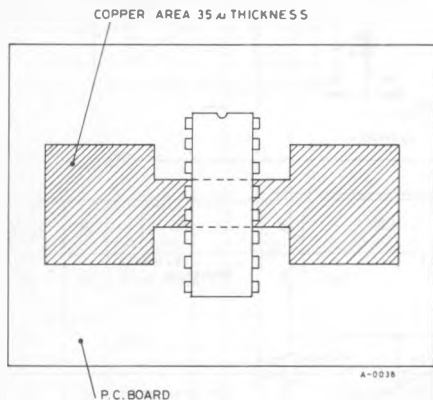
External heatsink mounting example ($R_{th} = 30^{\circ}\text{C/W}$)
